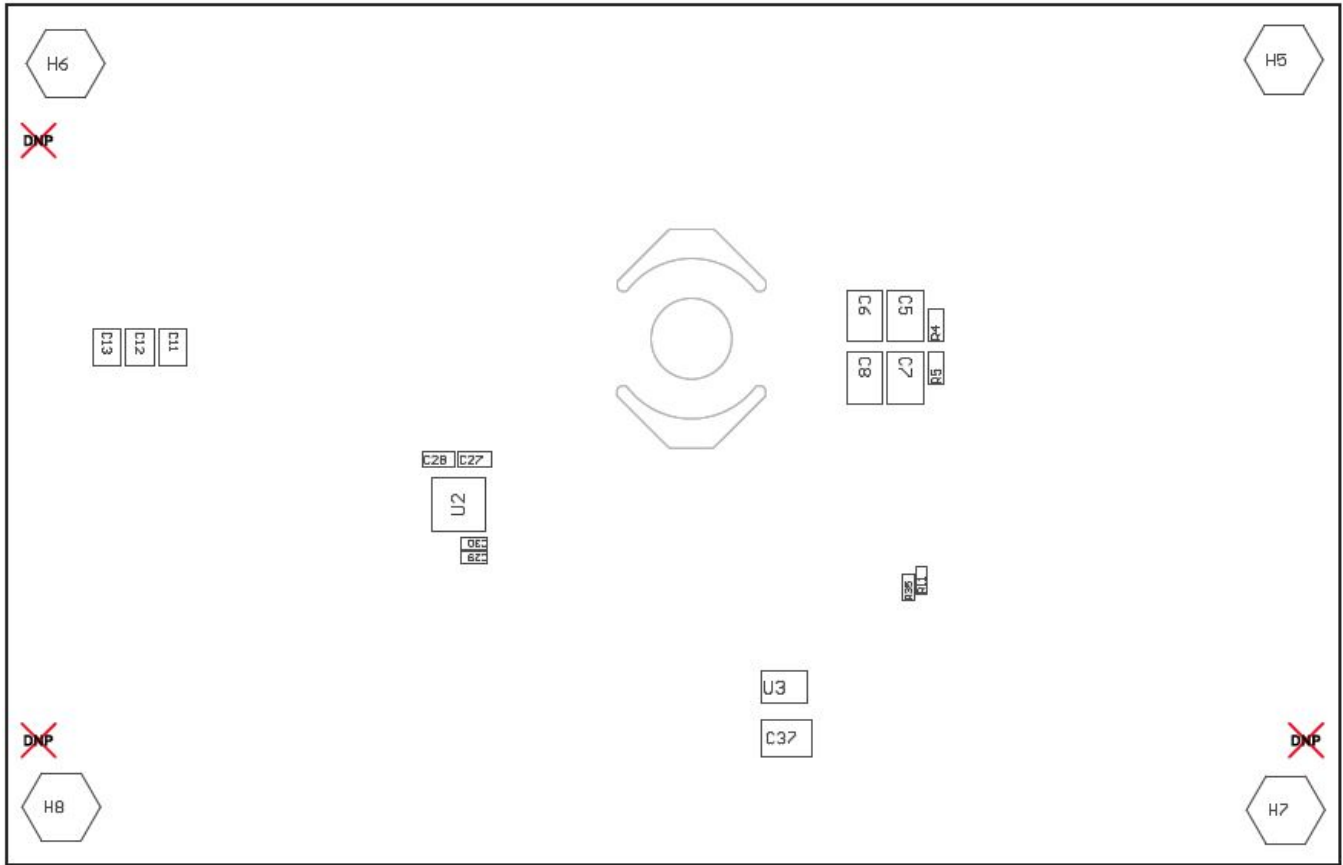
LM5036 EVM: Bottom Layer PCB Assembly File
